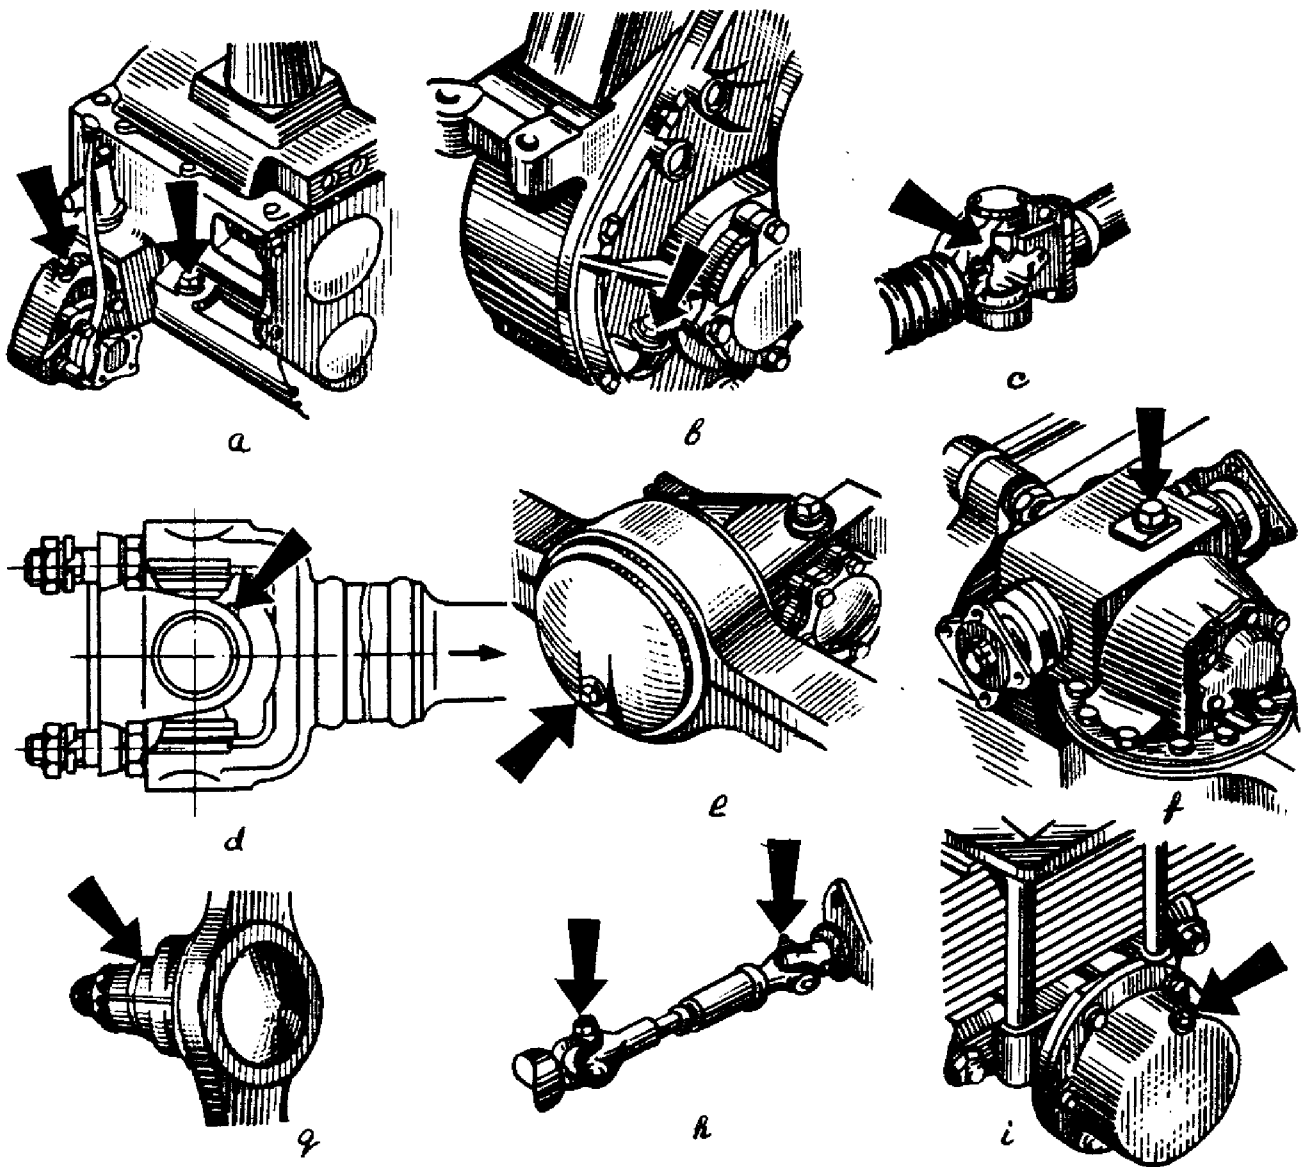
LUBRICATING POINTS FOR T-14B AUTOMOTIVE TRANSMISSION OIL (WITH ADDITIVE)
